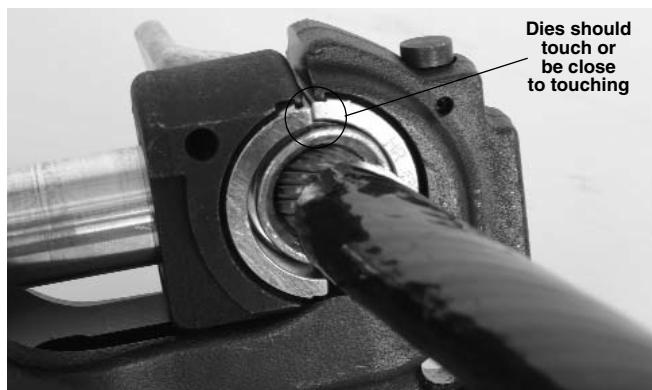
Inspecting Dies as Pressure Relief Valve activates
